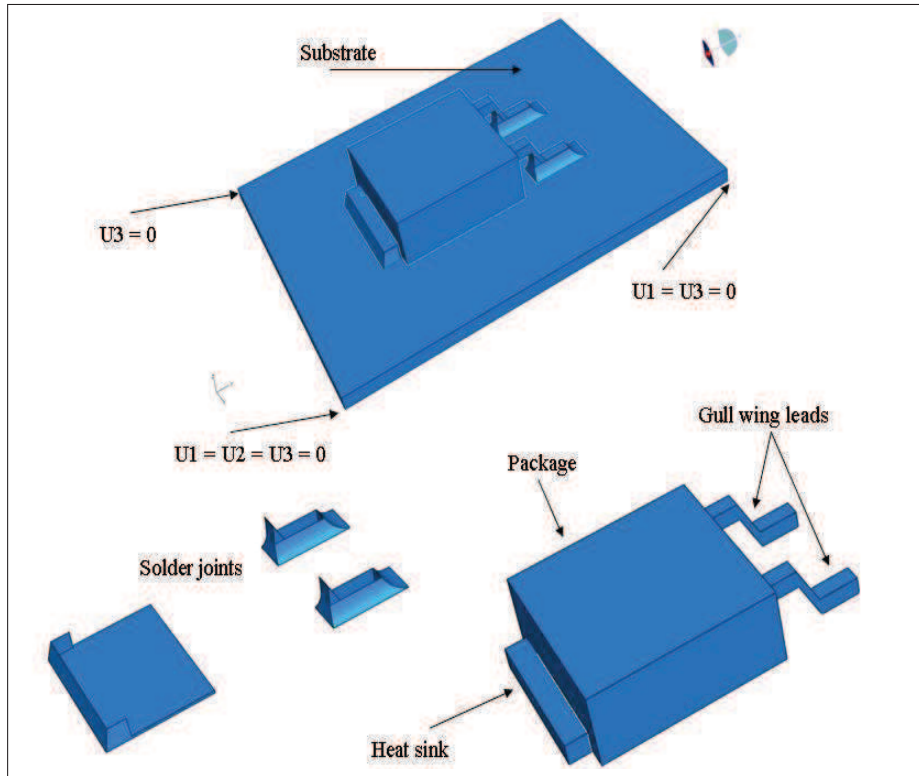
3-Dimensional model of the MP725 surface mount resistor, displacement boundary conditions are shown by U.
